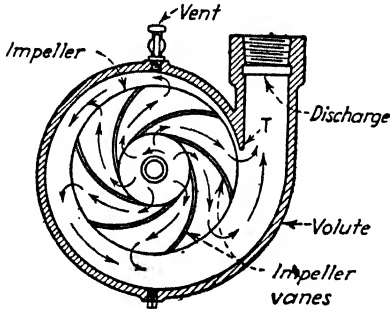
View looking at the inlet side of a centrifugal pump. (Courtesy of Power.)
